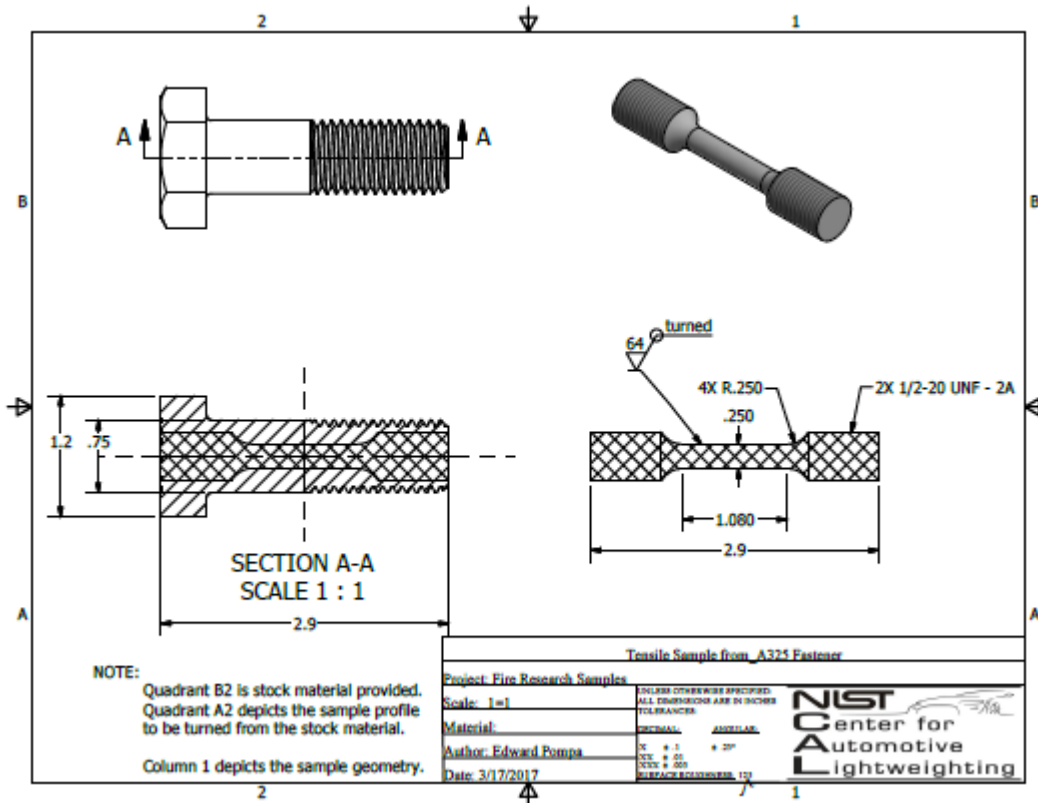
Tensile specimen machined from A325 bolt. Units = cm.
